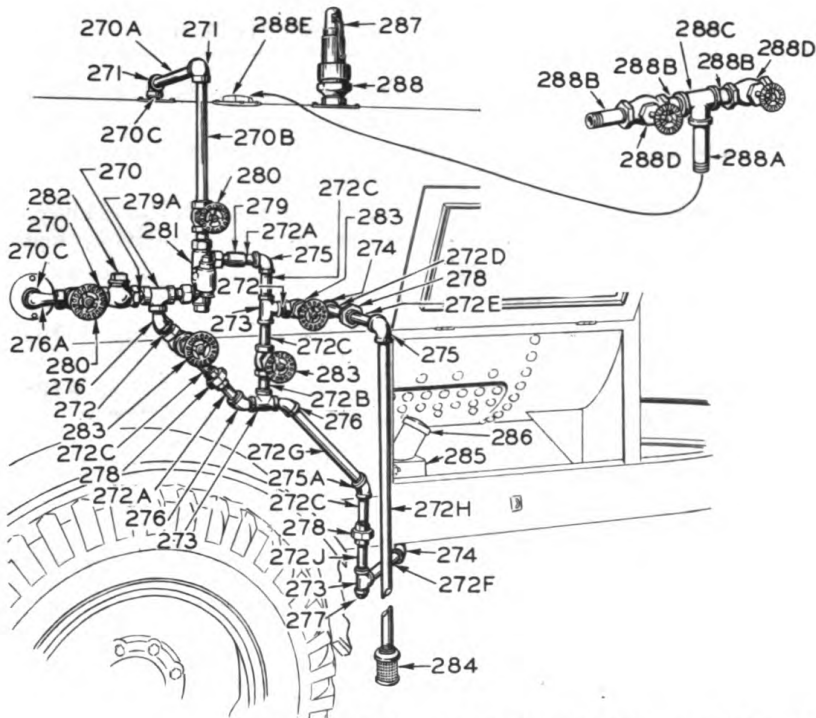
INJECTOR PIPING - STEAM POP VALVE
